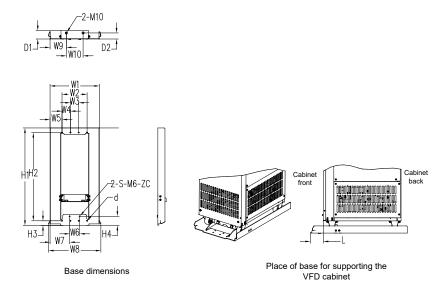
380V 220-500kW VFD base bracket dimensions and mounting
